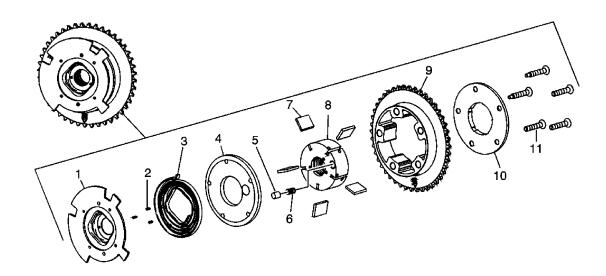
View Of CMP Actuator Components Courtesy of GENERAL MOTORS CORP.
